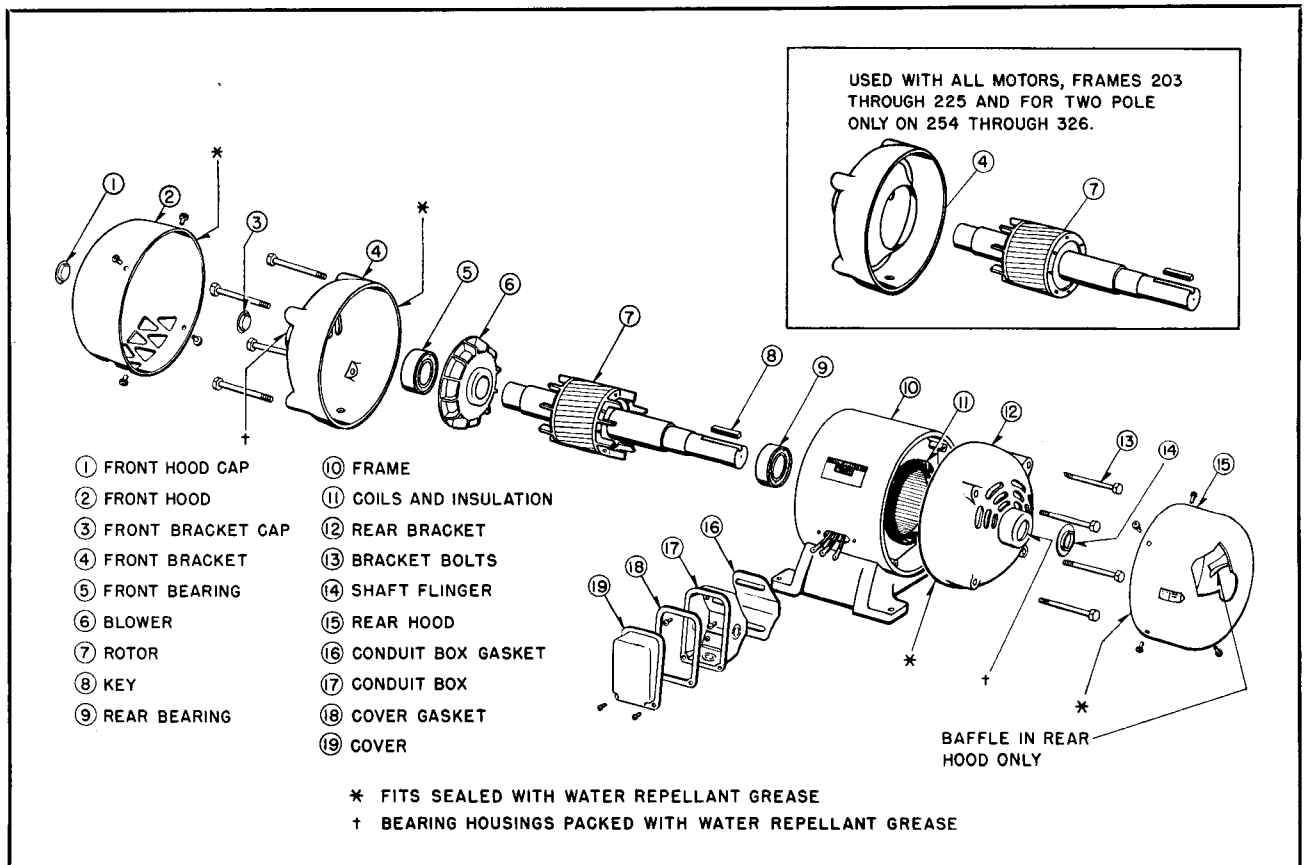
Arrangement of Parts—Splash-Proof Type CSP Motor (Frames 203-326)
